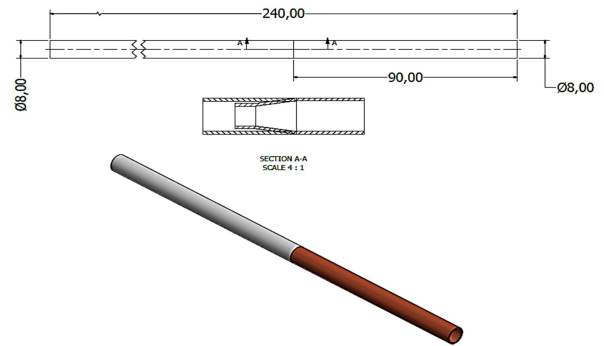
Dimensions of aluminum and copper pipe with eutectic connection.
